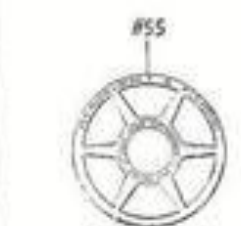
FIG. N, CAMPAGNOLO WHEEL ALIGNMENT TOOL
